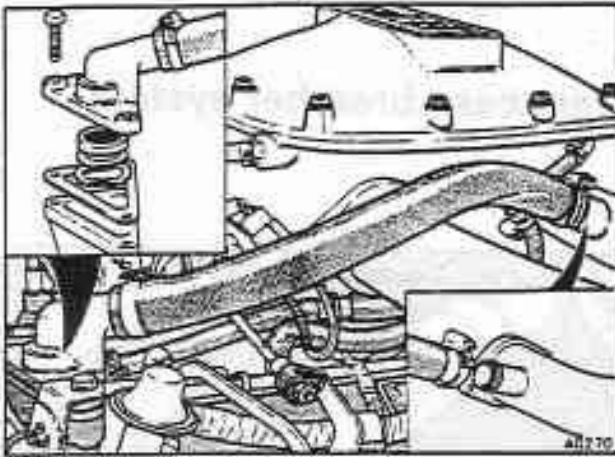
Crankcase breather (Solex 4 A 1 carburetters Mulsanne Turbo)
